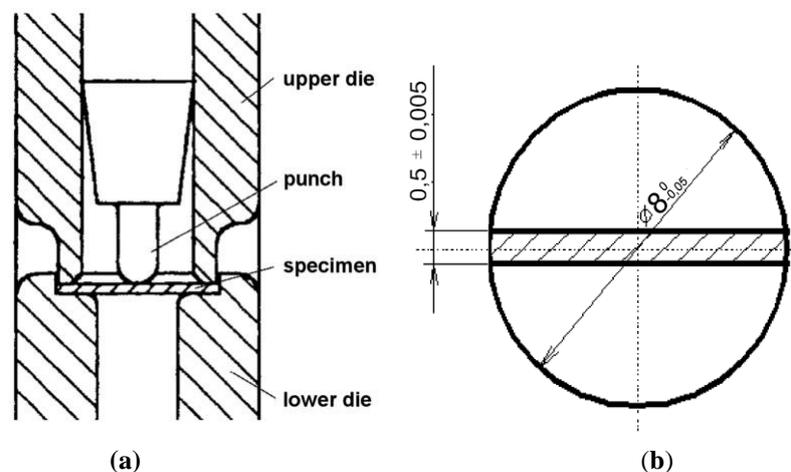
(a) Schematic of the setup for the SPT; (b) SPT specimen geometry with given tolerances [8].
